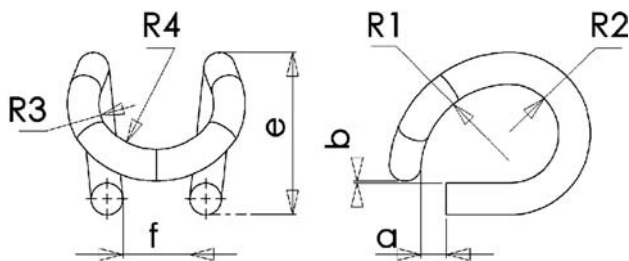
Tolerable dimensions of the SB4 spring clip [Fig. A. Aniszewicz]
